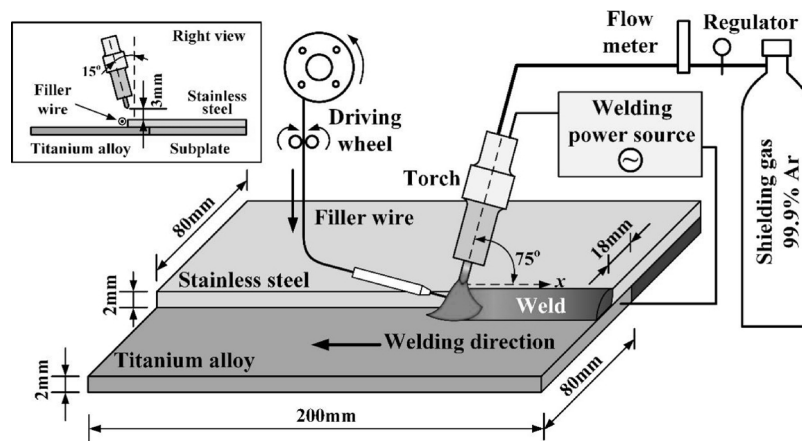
Schematic illustration of lap joining for TC4 titanium alloy/304 stainless steel with fillet weld by GTAW.
